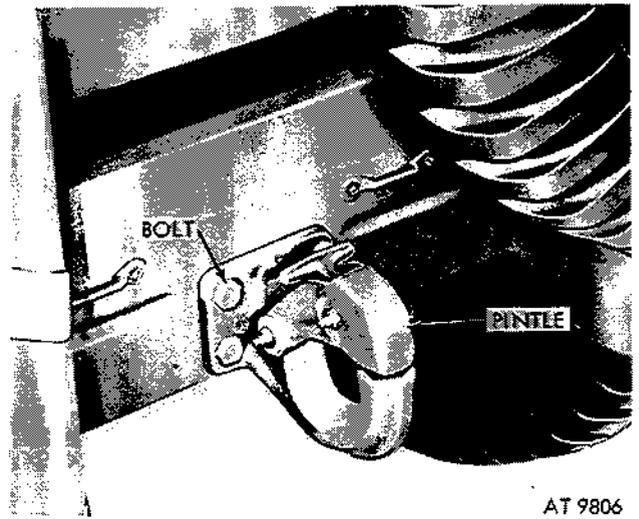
Remove towing pintle. (M151, M151A1, M151A1C, and M718 vehicles.)
